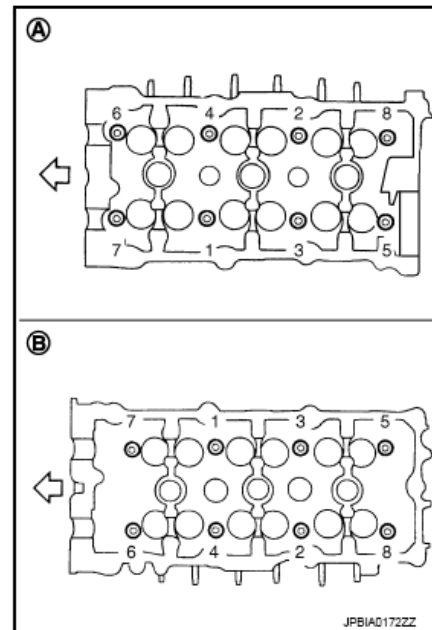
Identifying Cylinder Head Bolts Tightening Sequence
